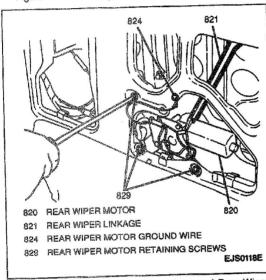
Removing Rear Wiper Motor and Rear Wiper Linkage
